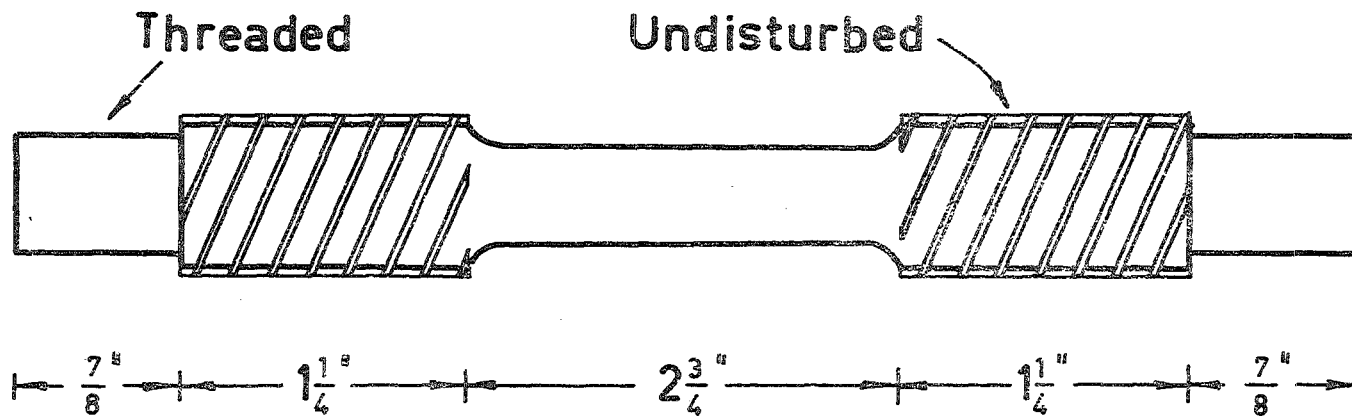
BAUSCHINGER TEST SPECIMEN
